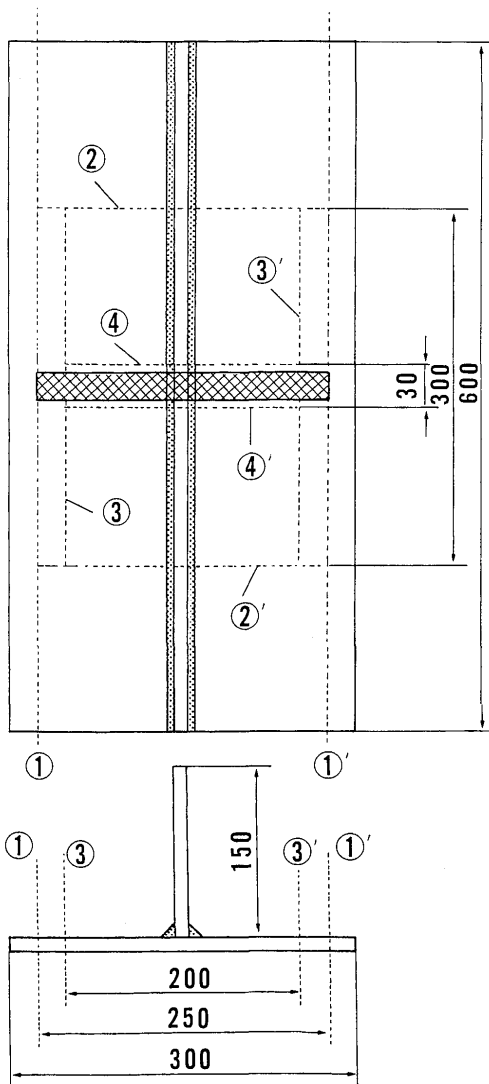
Sequence of cutting T-joint (Test Piece A)
